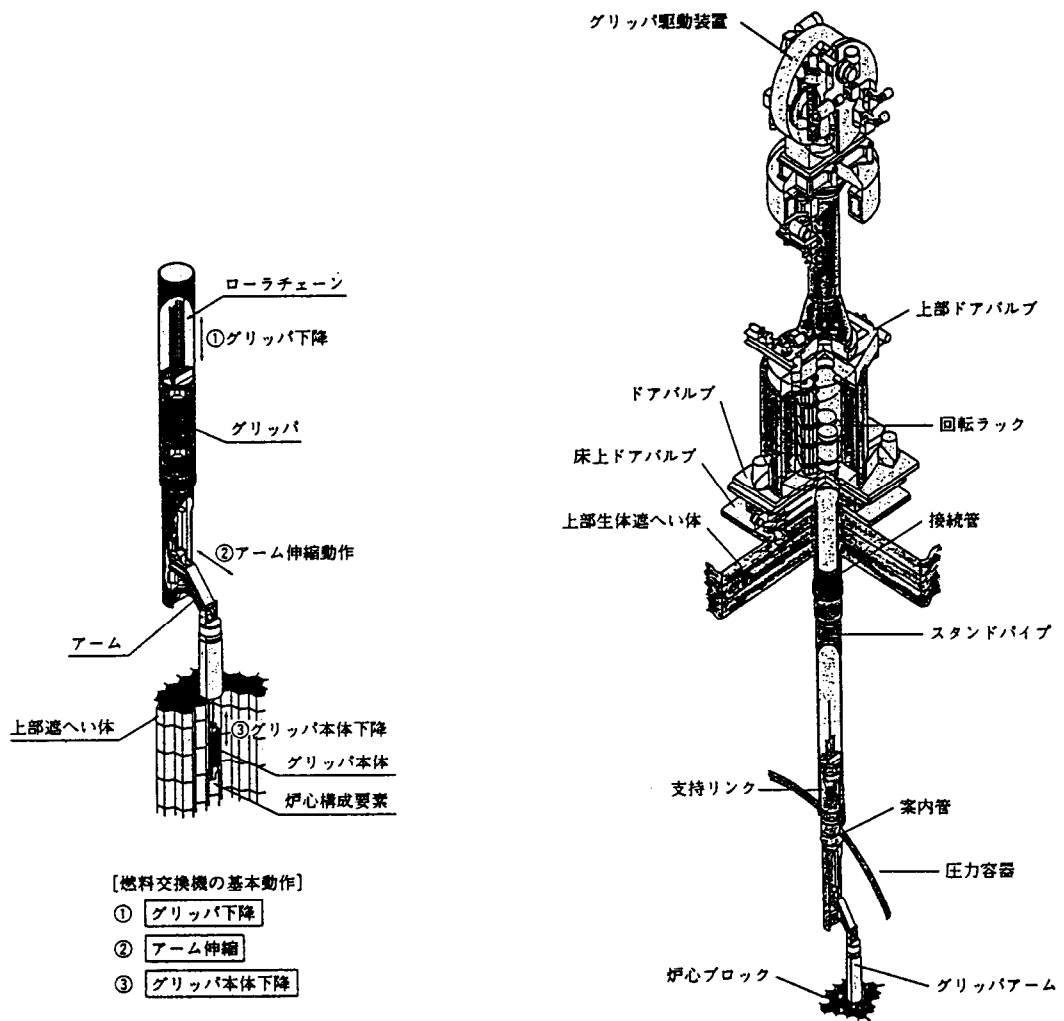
Bird's-eye view of fuel handling machine of HTTR
